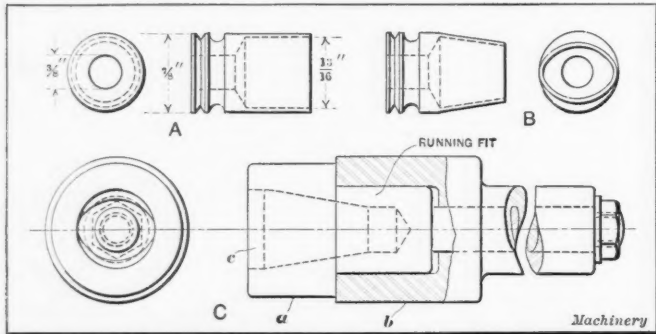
The Oval-shaped Shell and the Tool used in Forming it
